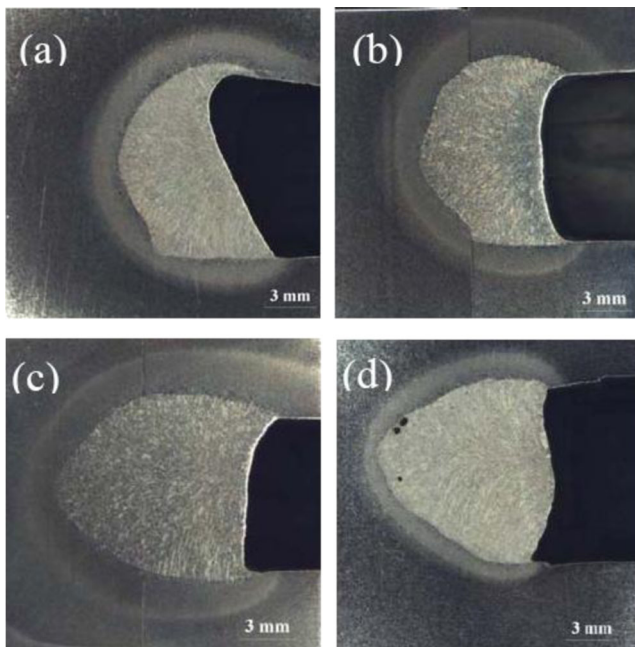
Cross-sections of weld with different wire feed speed: a 3.5 m/min; b 4 m/min; c 5 m/min; d 6 m/min
